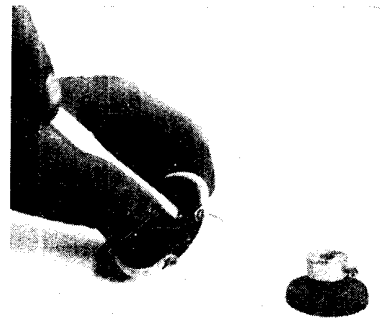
Here the brass strip, by which contact is made to the spindle, is being fixed in position
